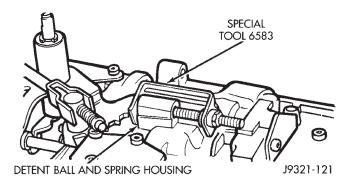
Securing Detent Ball And Spring With Retainer Tool
